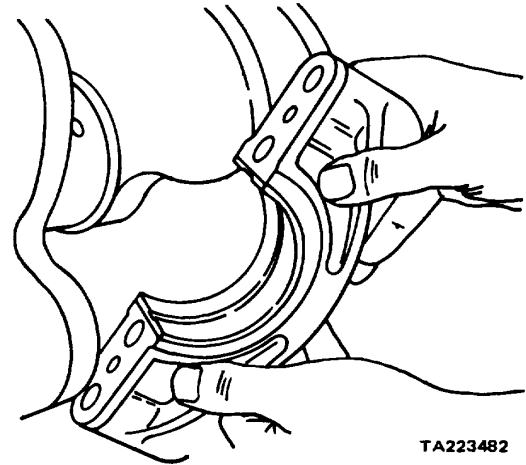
Checking Bearing Clearance with Shim Stock.
